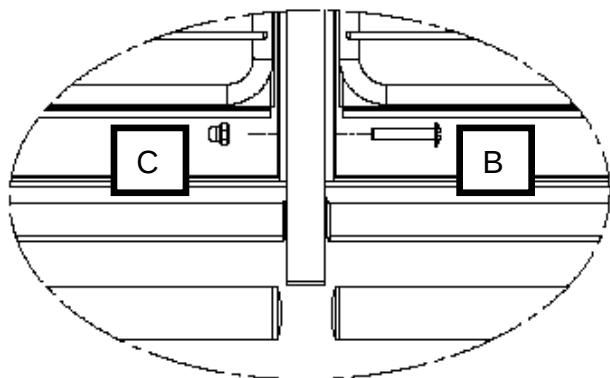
Detail F; cabinet joining (see also fig. 9 chap. 8.4.2 or fig. 14 chap. 8.4.3)
